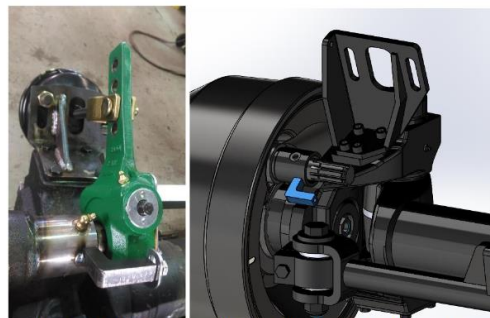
Threaded “L” shaped control arm receiver shown welded to camshaft support bracket.
